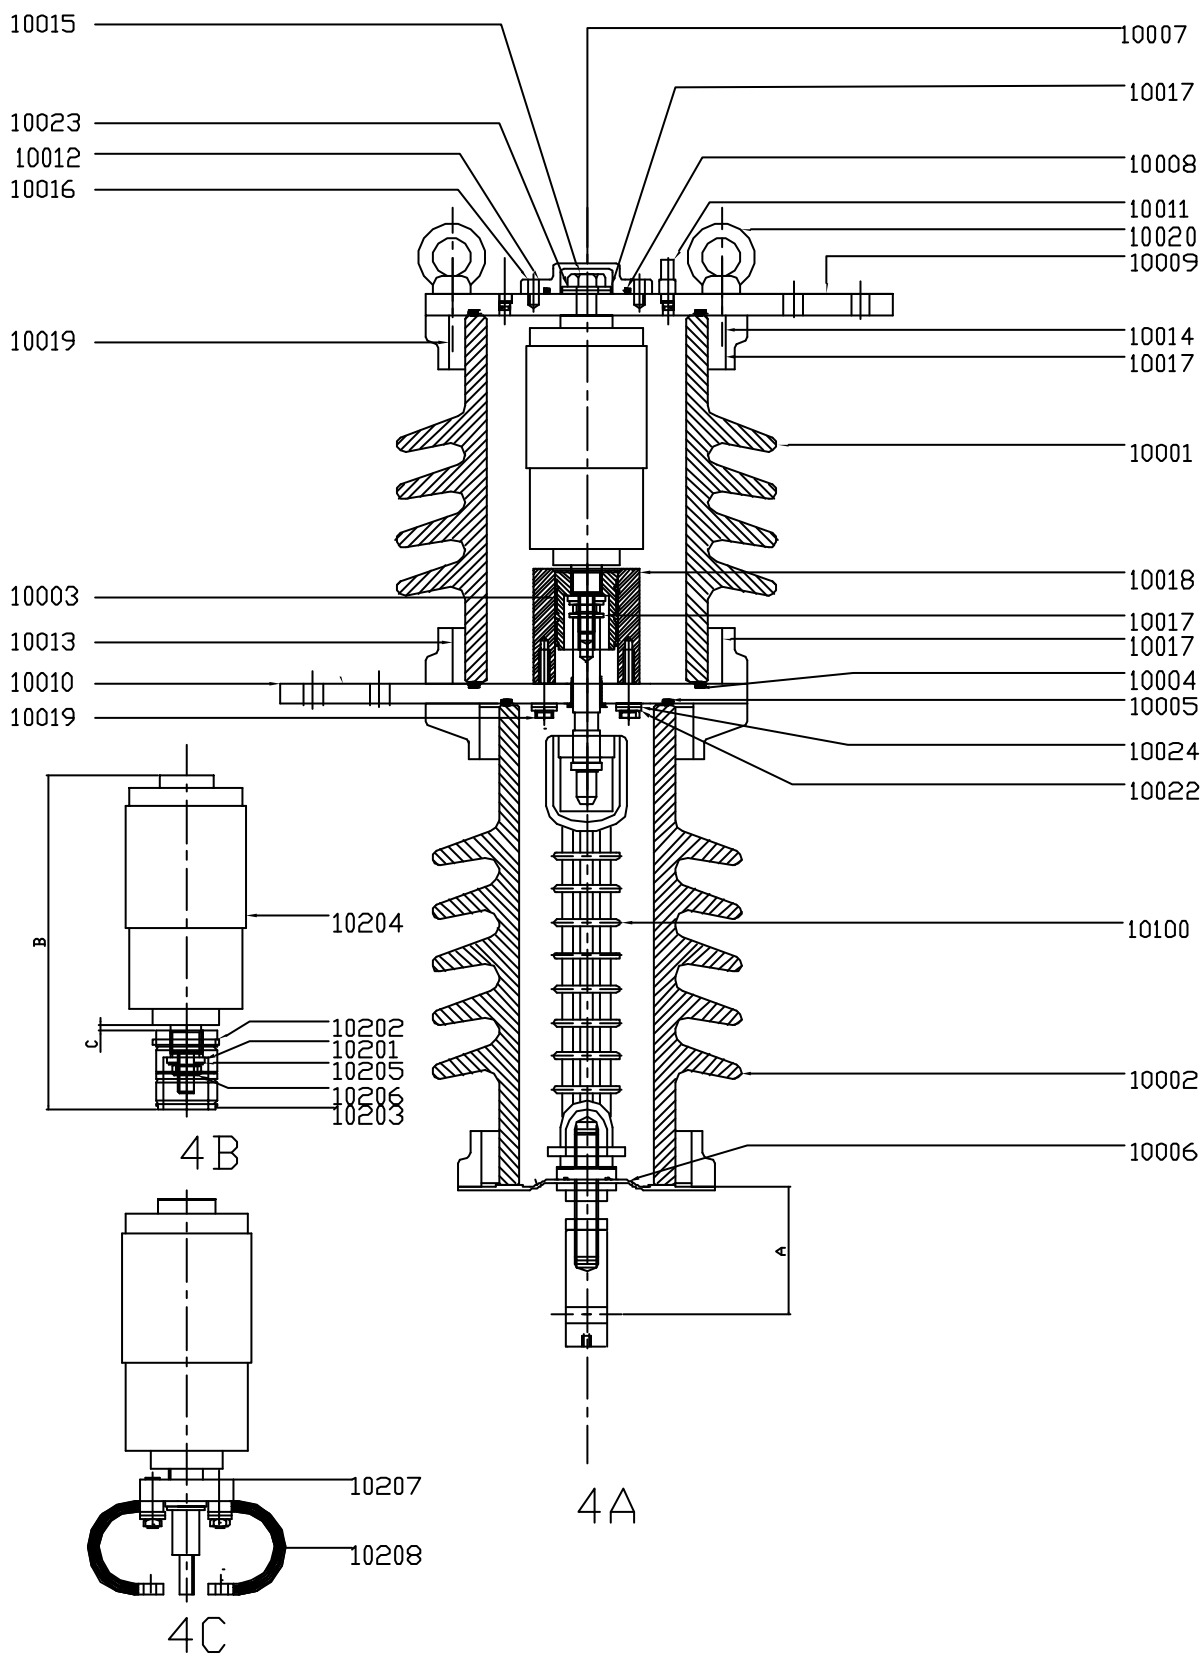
Breaker Pole Assembly (Refer legend on pg. 48)
